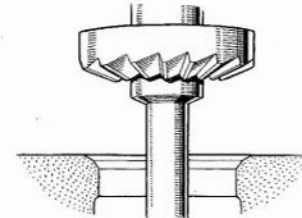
Churchill 15° Valve Seat Cutter Tool
